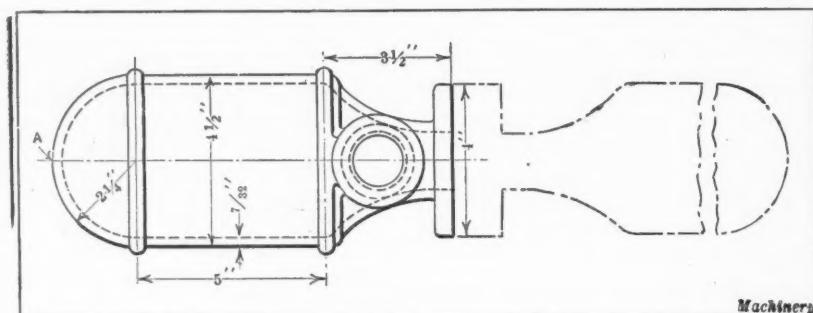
Piston Pump Air Chamber and Core used in molding the Casting
